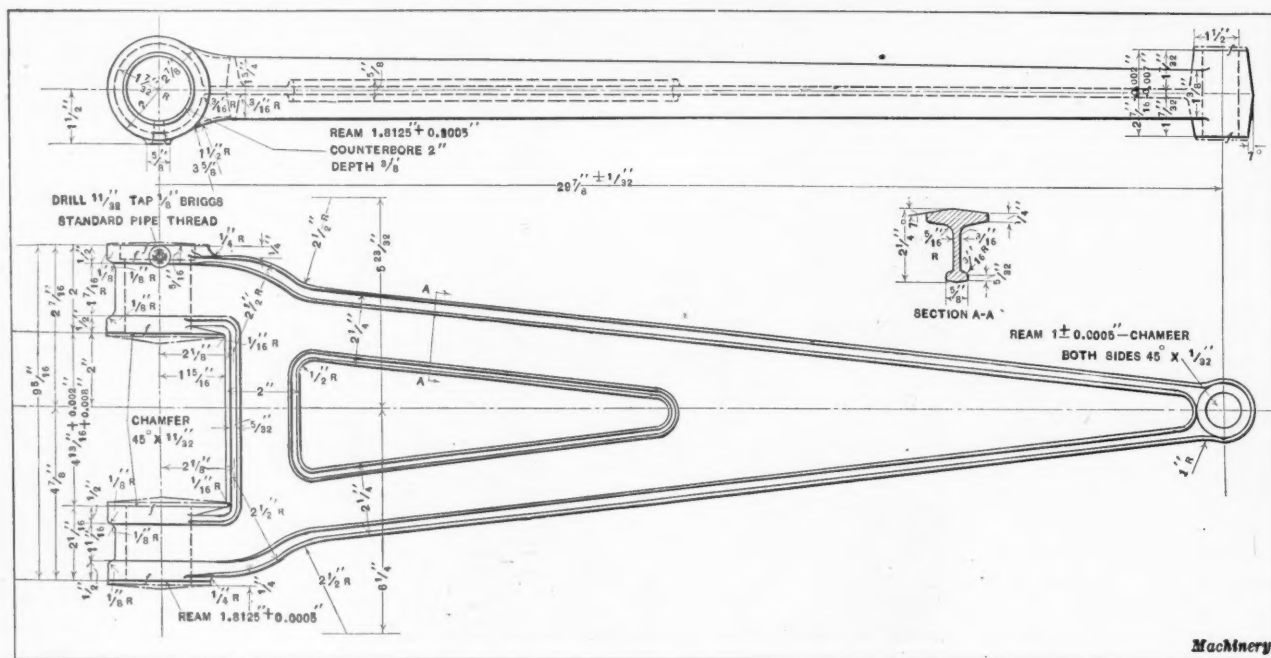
Rear Axle Torque Arm drop-forged in the Dies shown in Fig. 8
